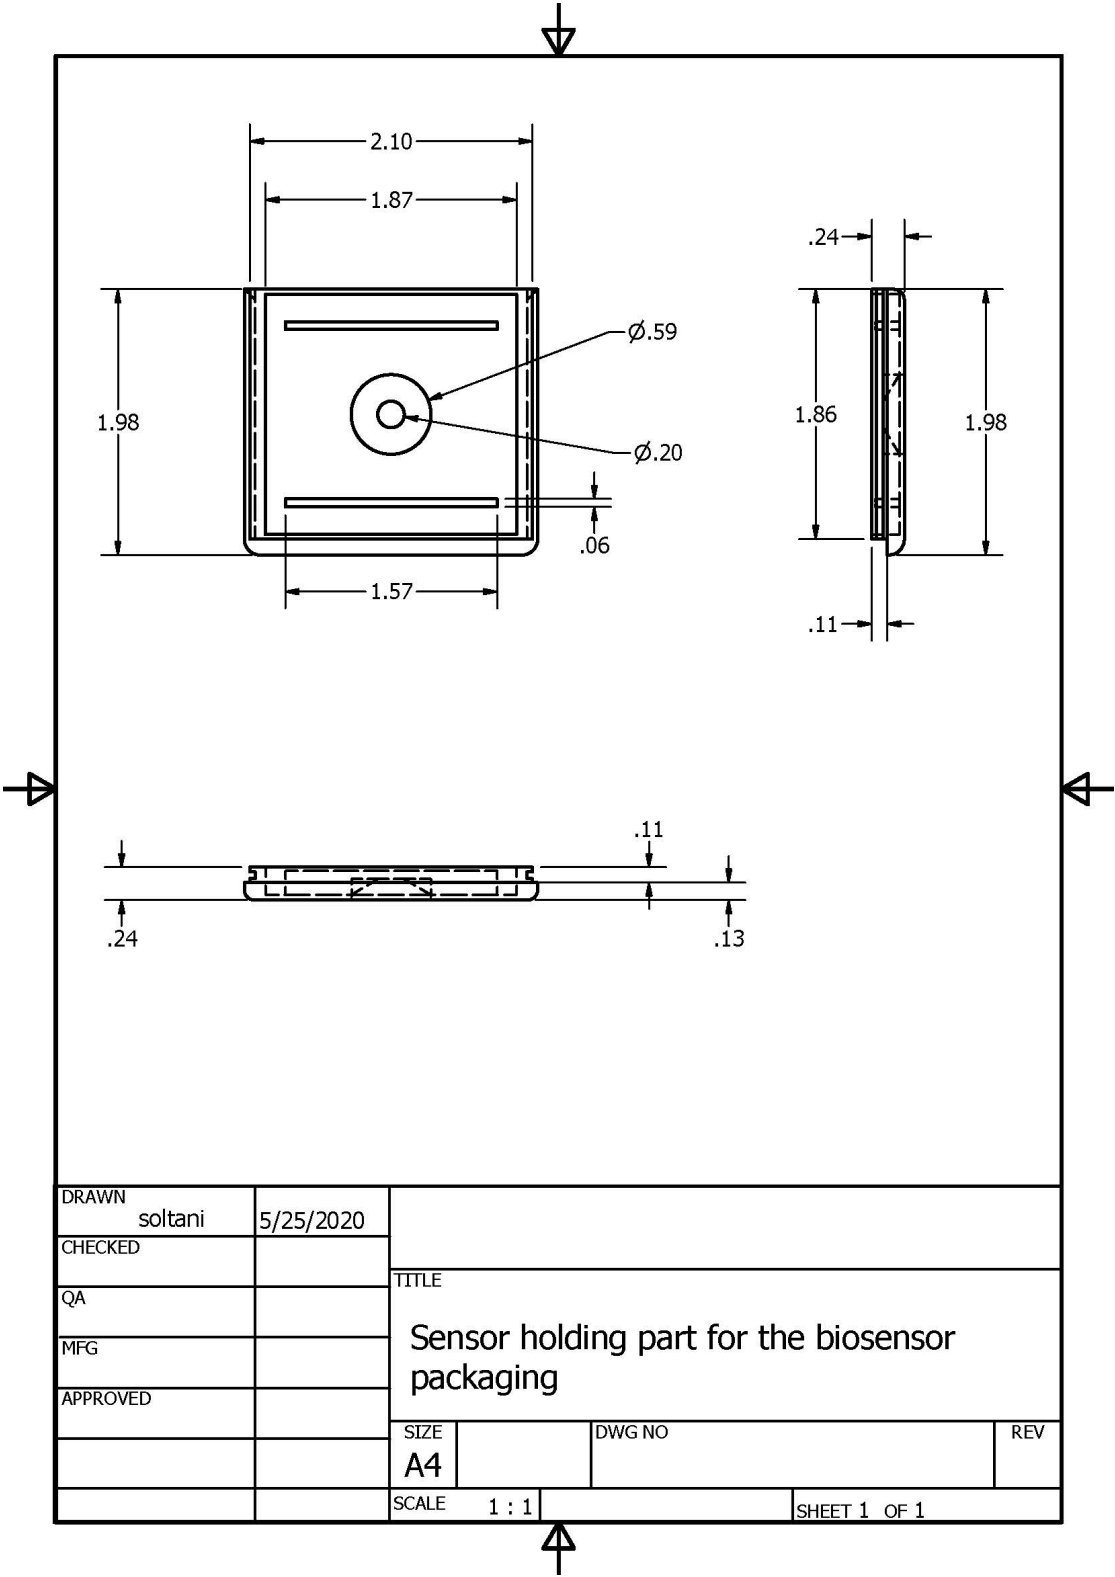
Technical drawing for the sensor holding part, illustrated in Fig. 3.9.
